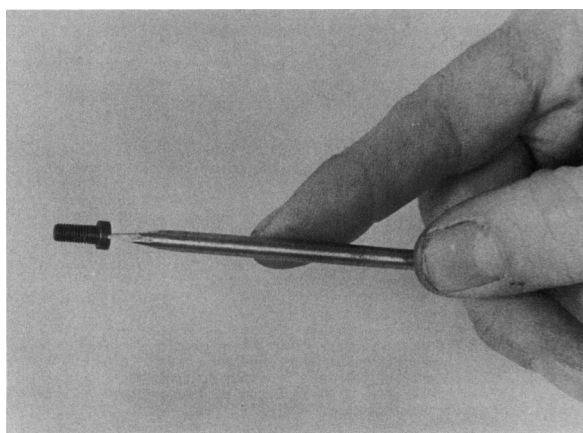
Properly fitted screwdriver supporting screw without glue!
